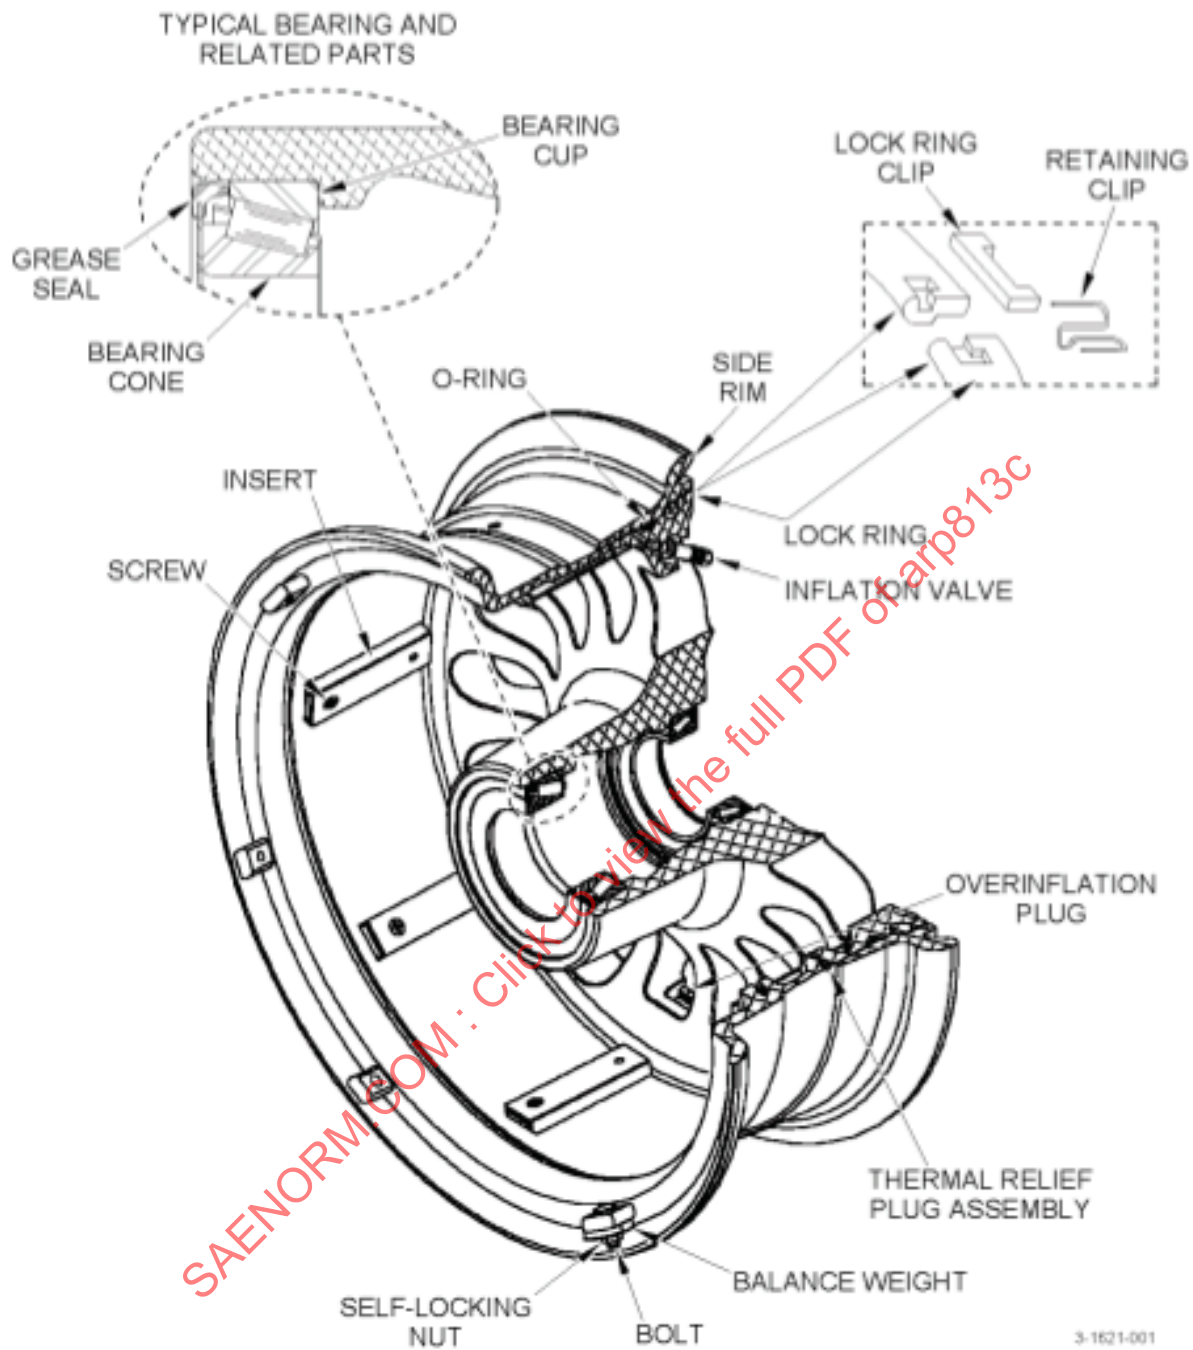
AIRCRAFT LOCK-RING WHEEL NOMENCLATURE
